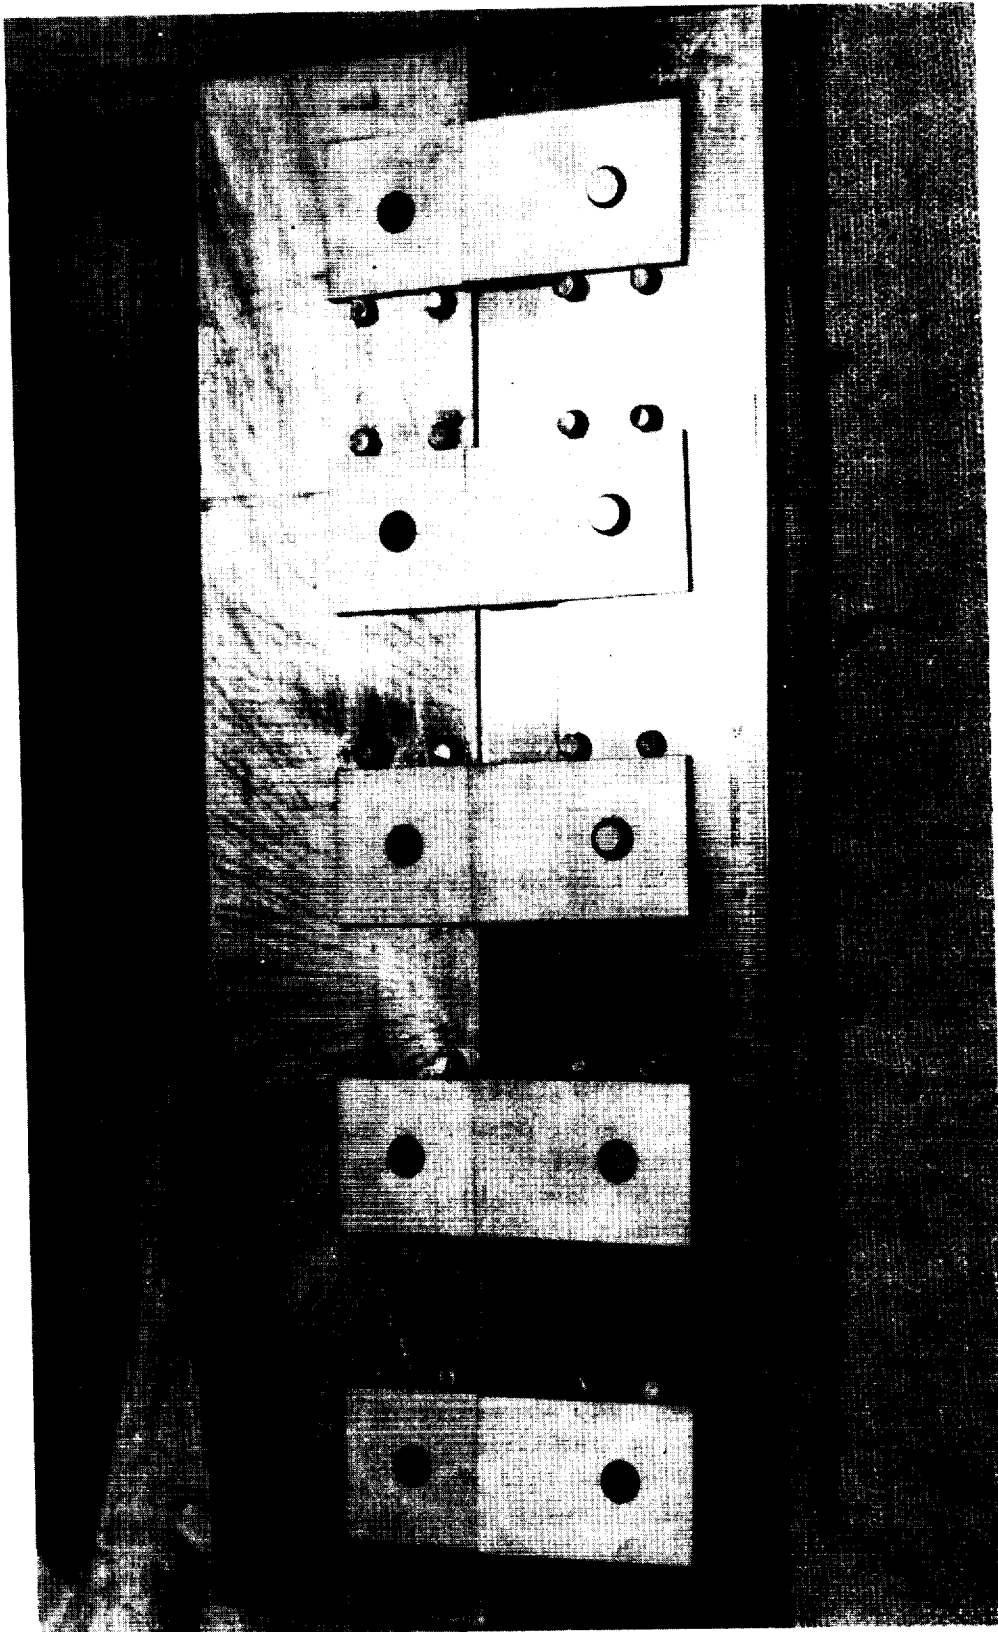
THIRD STEP IN THE ASSEMBLY OF ADHESIVE BONDED TEST SPECIMENS
